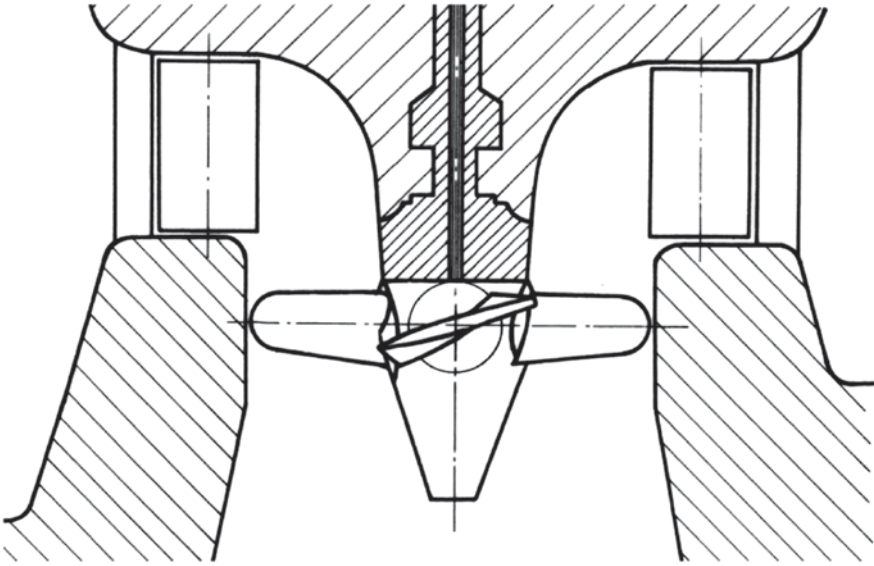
Kaplan; adjustable rotor blades and stator vanes
